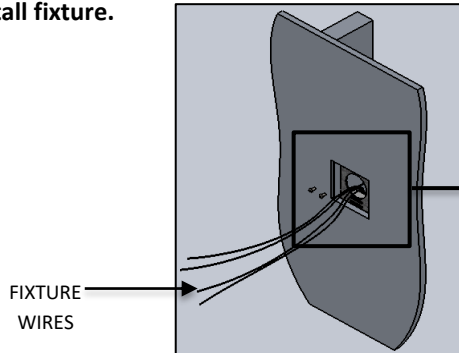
DRIVER PLATE RE-ASSEMBLED
